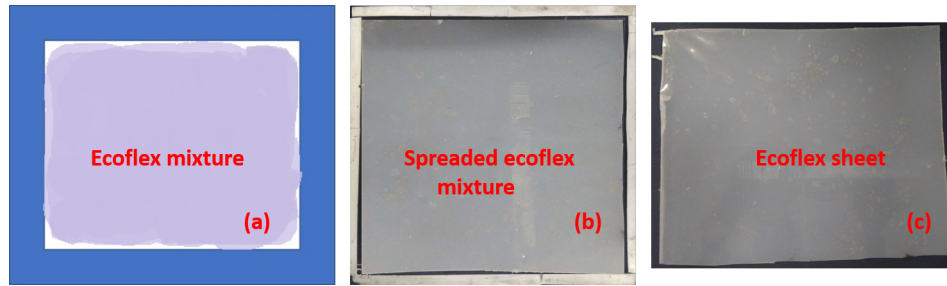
(a) Designed mould with ecoflex mixture (b) fabricated mould with spreaded Ecoflex mixture (c) prepared Ecoflex sheet
